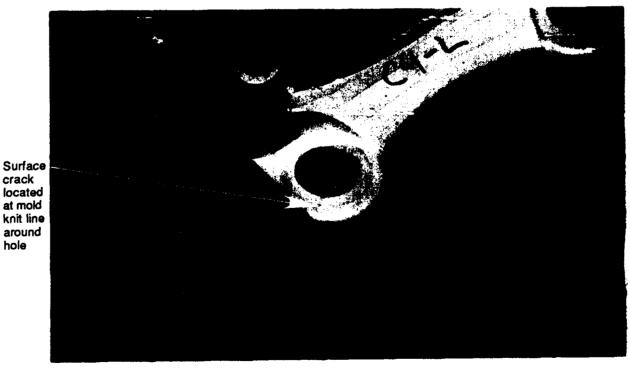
TR-317 brackets after explosive shock testing at the HI-Test explosive shock test facility
